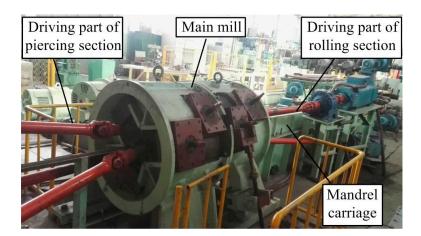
Tandem skew rolling mill [36] (Reprinted from ref. [36]).
